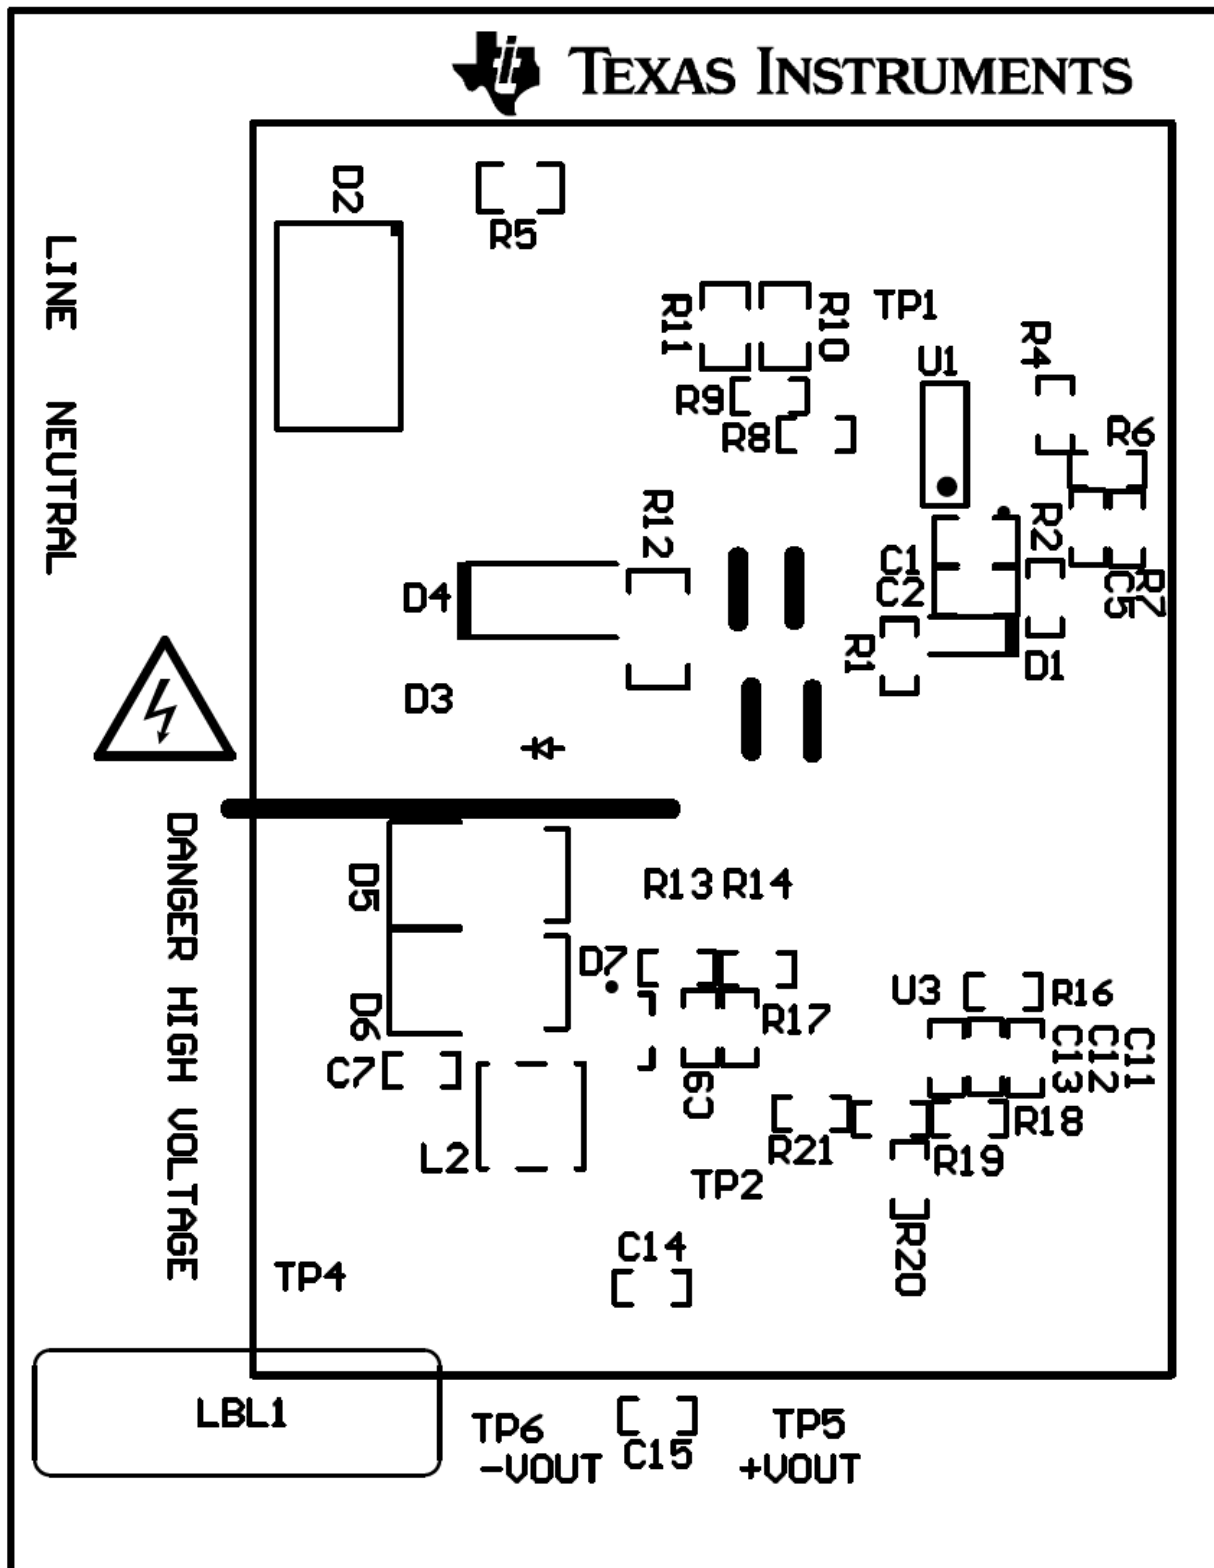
UCC28740EVM-525 Bottom Layer Assembly Drawing (Bottom view)
